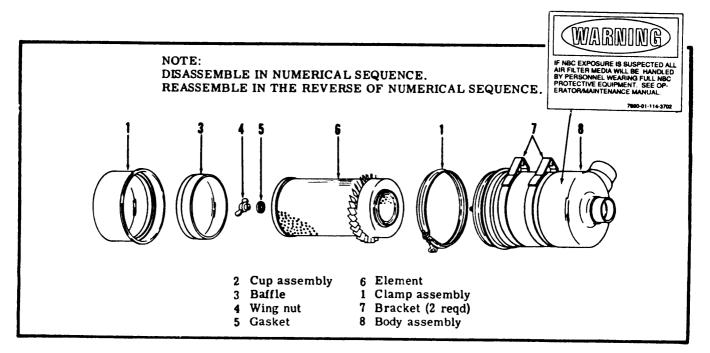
Compressor Air Cleaner and/or Engine Air Cleaner, Disassembly and Reassembly.
